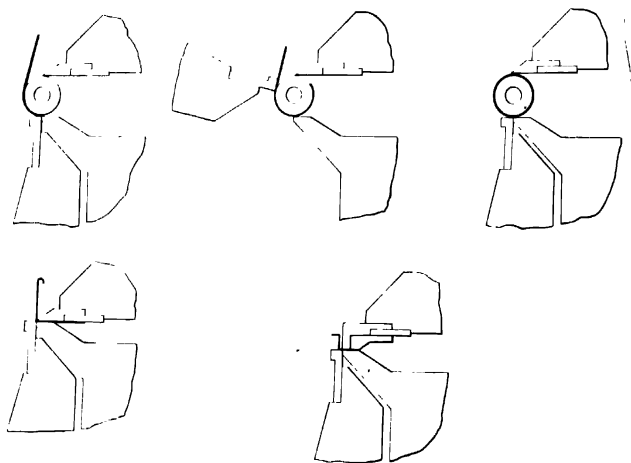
Some operations performed on a universal folder and bender (F. J. Edwards, Ltd.)
